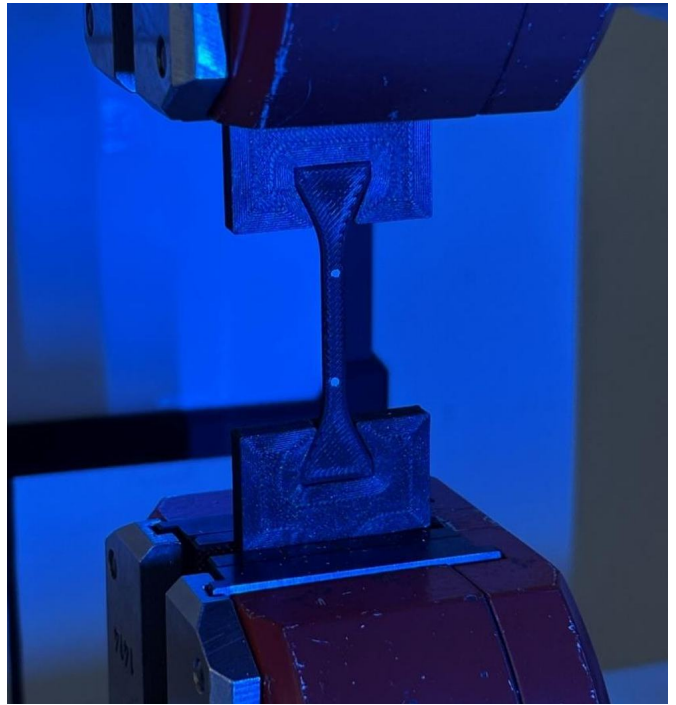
illustrates the small custom-shaped grips that were modelled and 3D printed to hold the test specimens and to allow their ends to be clamped in the standard jaws of the available tensile testing machine.
